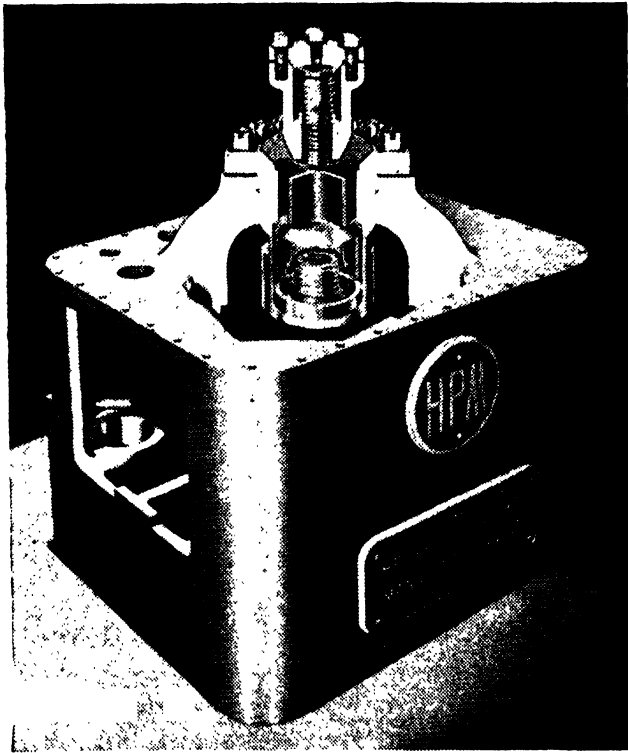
The dome of a hydraulic-press cylinder, cut away to show the surge valve. (*The Hydraulic Press Mfg. Co., Mount Gilead, Ohio.*)
